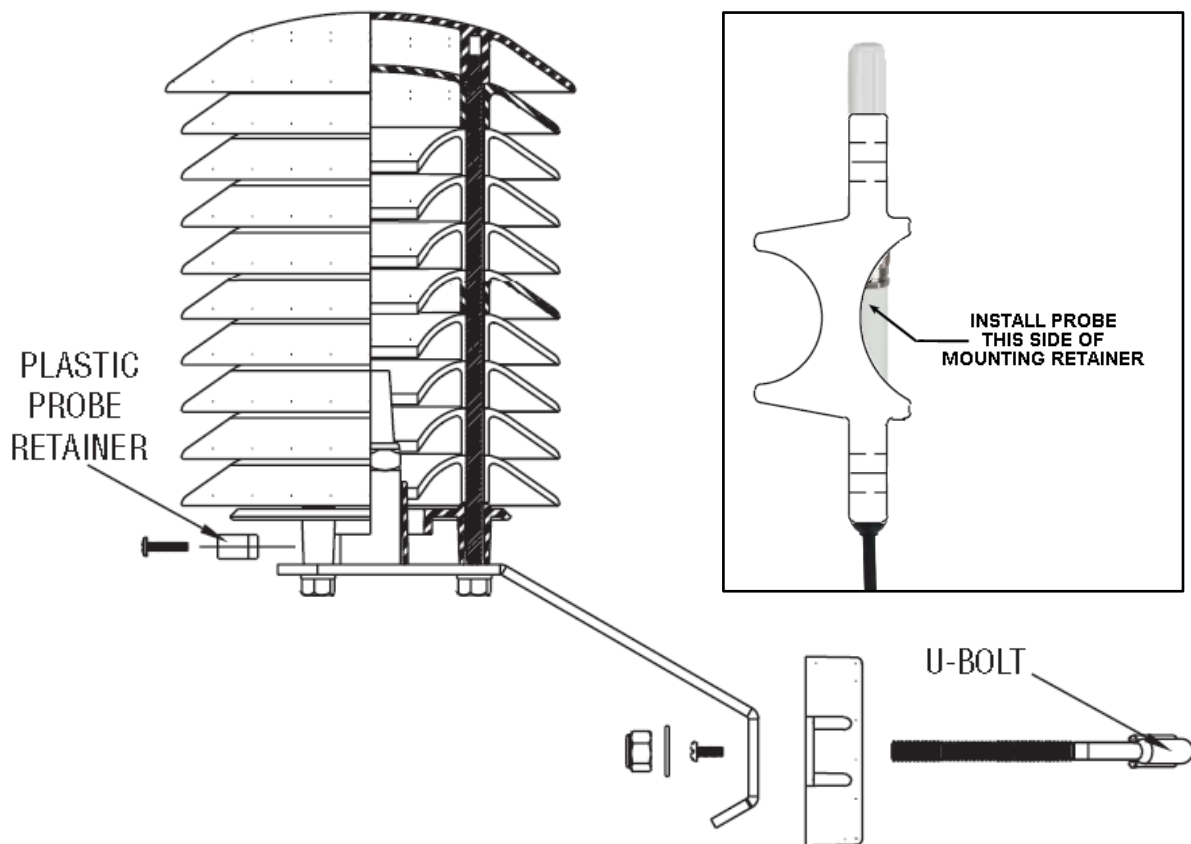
Model 8141-D Dwyer Radiation Shield Mounting Instructions
